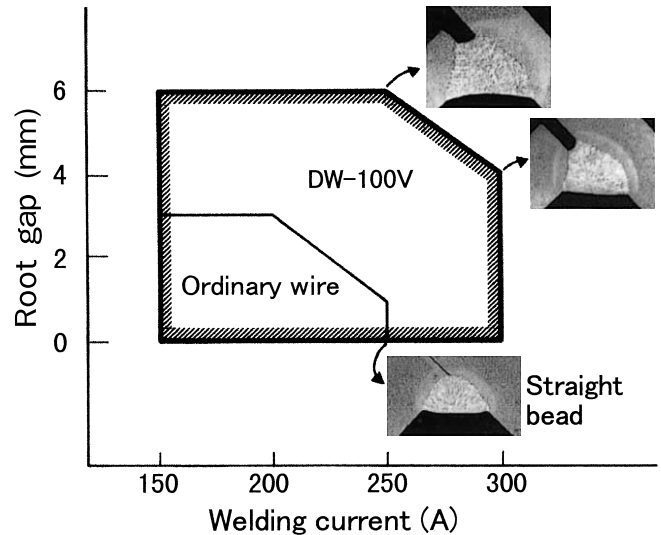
Proper welding current ranges of DW-100V and a conventional flux-cored wire in vertical-up welding (wire dia: 1.2 mm)
